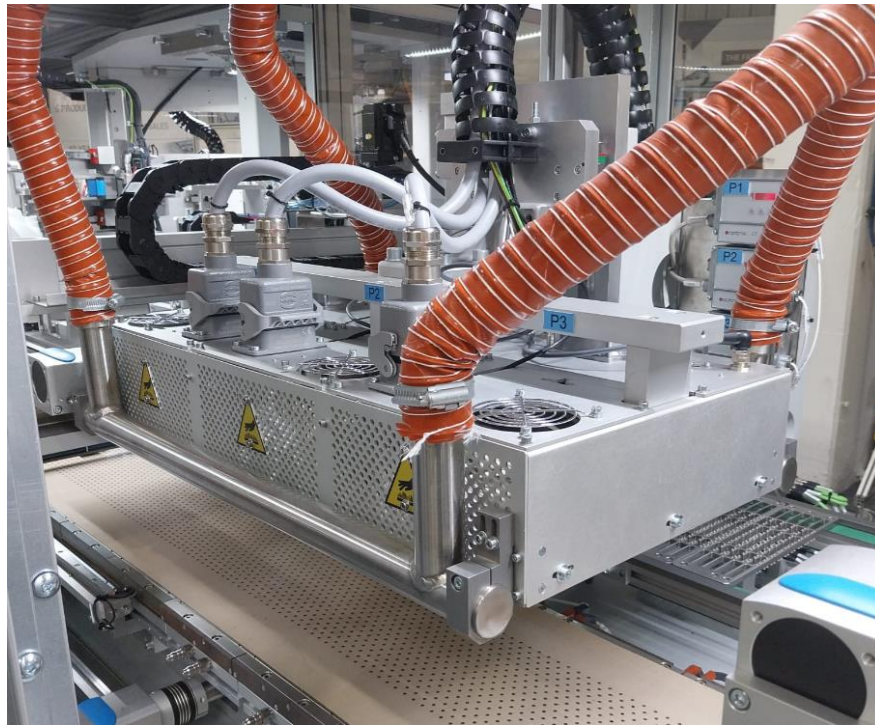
Welding (process developed for Zebra+ECA)
